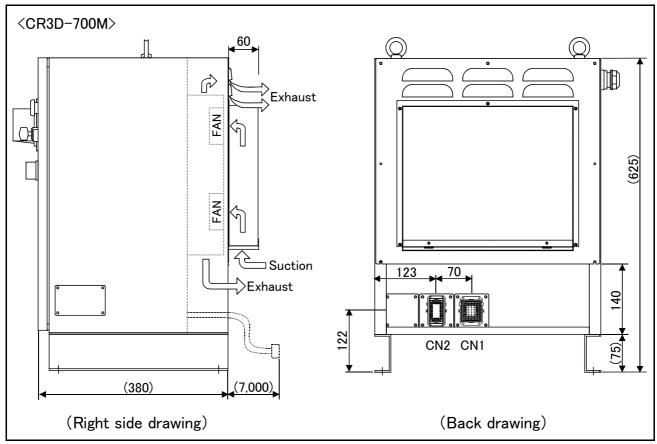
Outside dimensions of controller (CR3D-700M Supplement)
